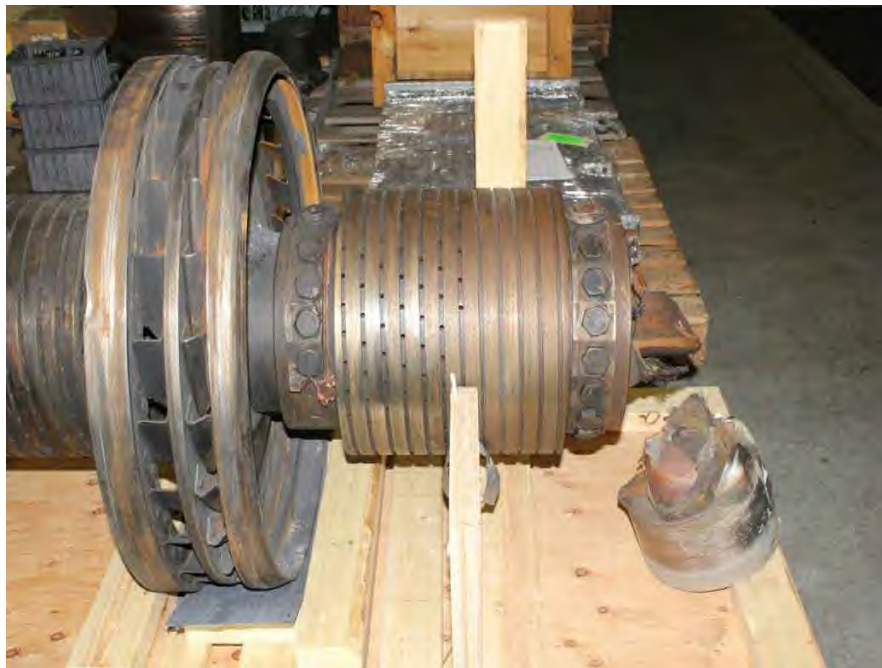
Forward end of generator shaft shown in Fig. 307 showing both halves of shaft fracture.
